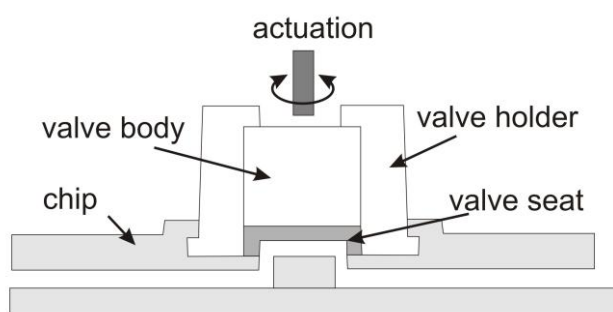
Concept of the rotary valve. All components are manufactured using injection molding. Assembly can be automated.
